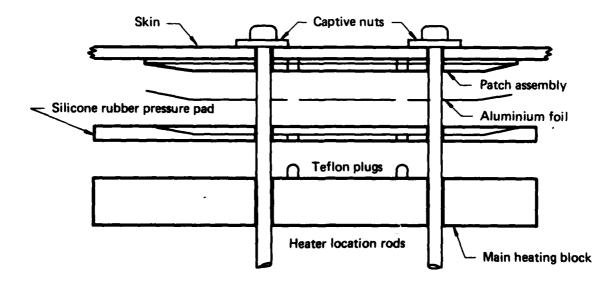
Pressurising assembly for application of the aluminium protective foil.
